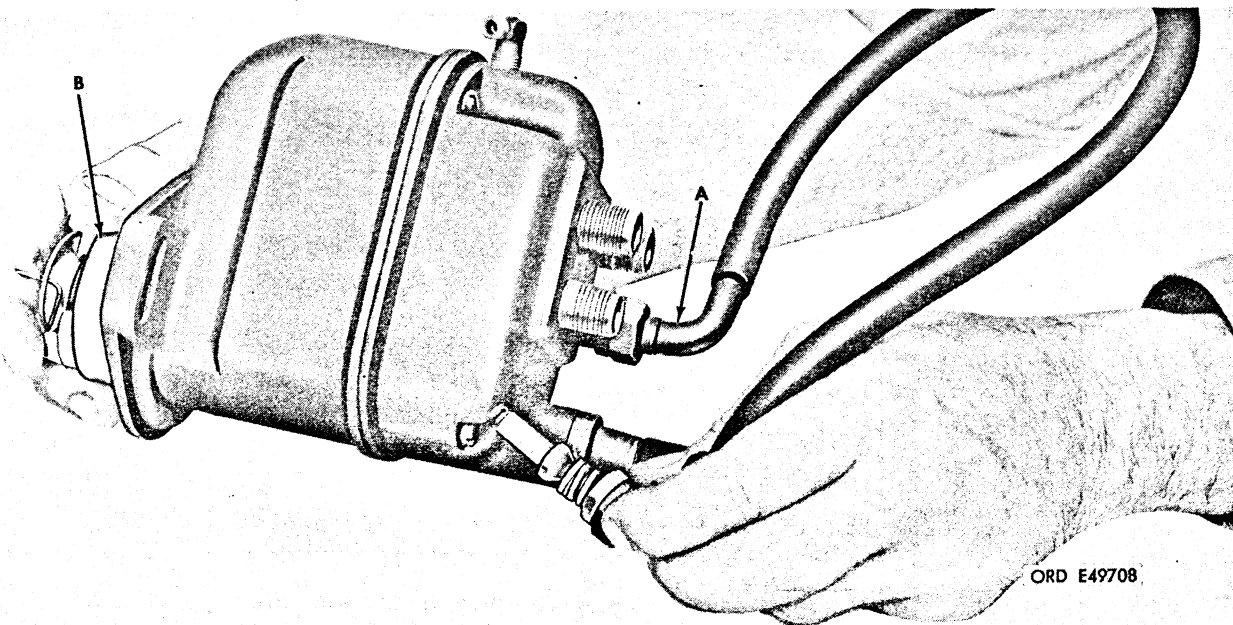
CHECKING OPERATION OF MAGNETO ASSEMBLY.
